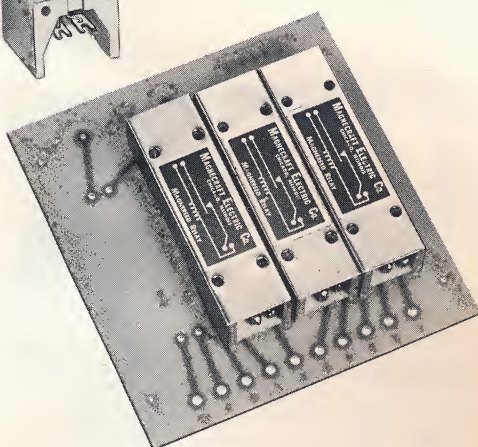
Quick, plug-in assembly to circuit boards. The steel snap-on cover provides magnetic shielding between coils. Normally, printed circuit soldering is adequate for rigid mounting; four holes for NC-2 screws provide additional hold-down security when required. See Fig. 6.
